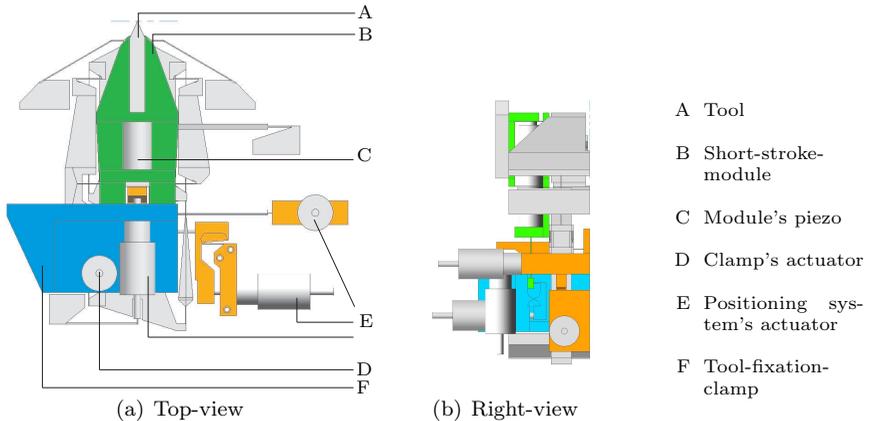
Toolholder for intuitive manual tool position adjustment of the profile tool. Using this toolholder reduces the maximum position adjustment time
